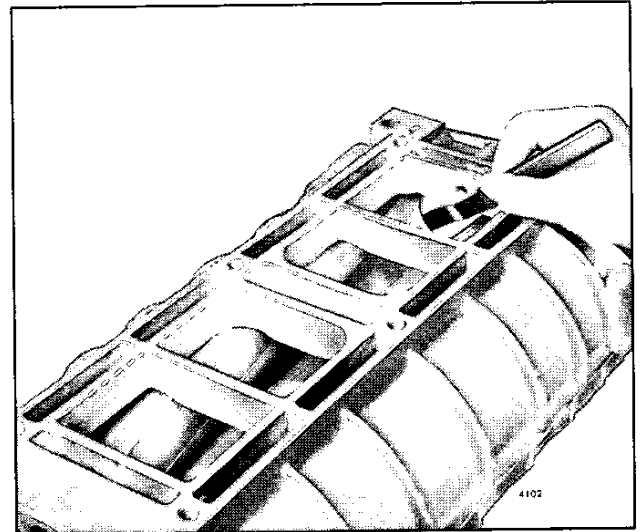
Measuring End Clearance Between Blower Rotors and End Plate
